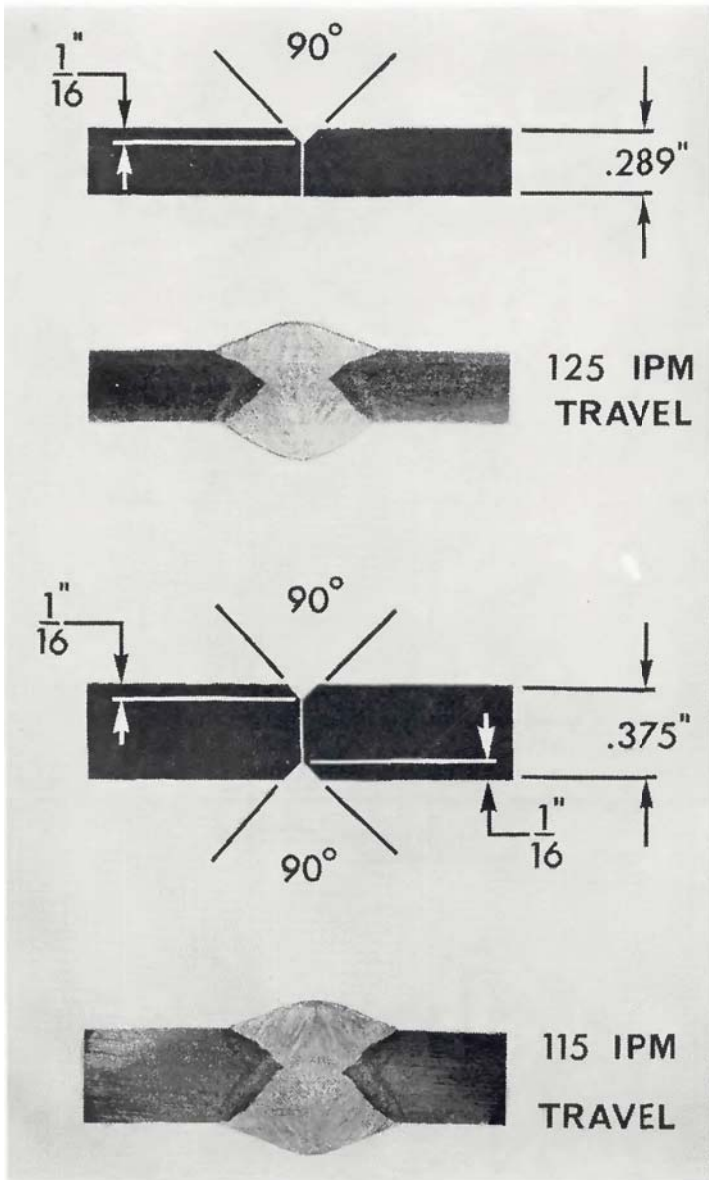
Joint designs and weld cross sections for 0.289 and 0.375 in. thick plate
